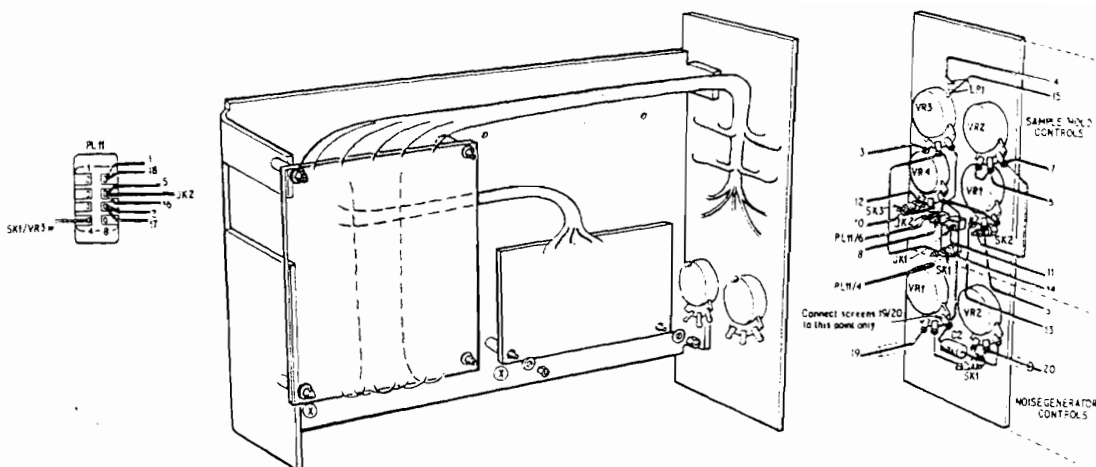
Front panel component assembly with details of mounting and disposition of board on the module support plate. The small ringed X on the board edges indicates orientation. (See board assembly figures) For direct programming from the v.c.o. module connect SK11/4 to SK8/2
